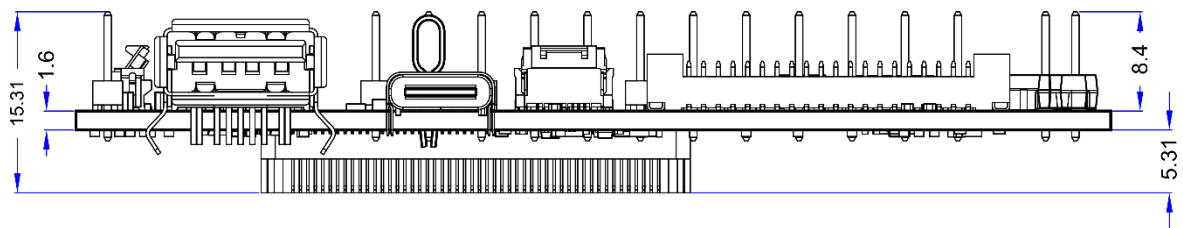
Verdin iMX8M Plus Mezzanine – mechanical dimensions in mm (front side, front view)
